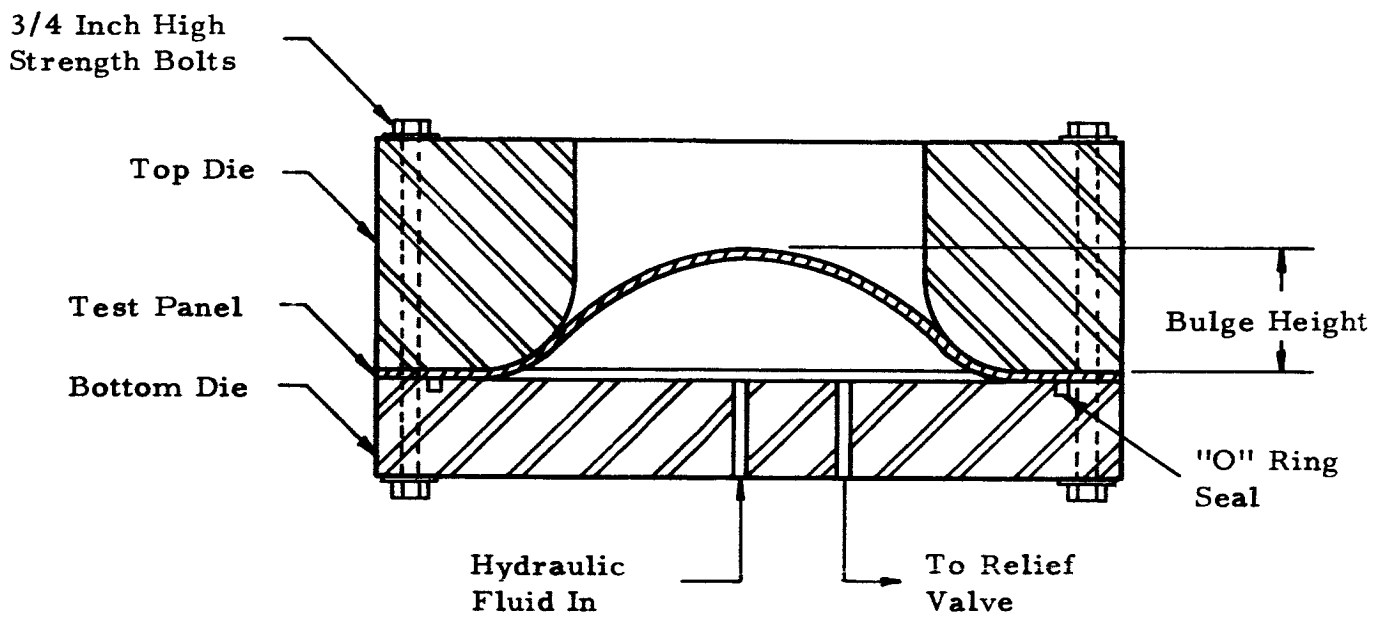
SCHEMATIC DIAGRAM OF HYDRAULIC BULGE TEST FIXTURE
